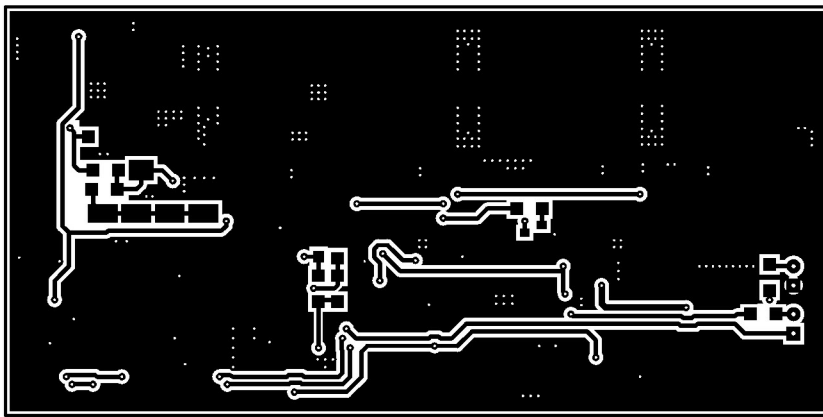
Bottom side PCB layout for the ATV transmitter
